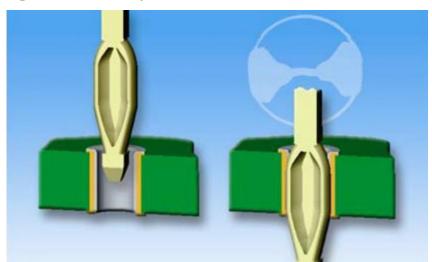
Assembly of a Press Fit Pin Connector into a Board Structure
